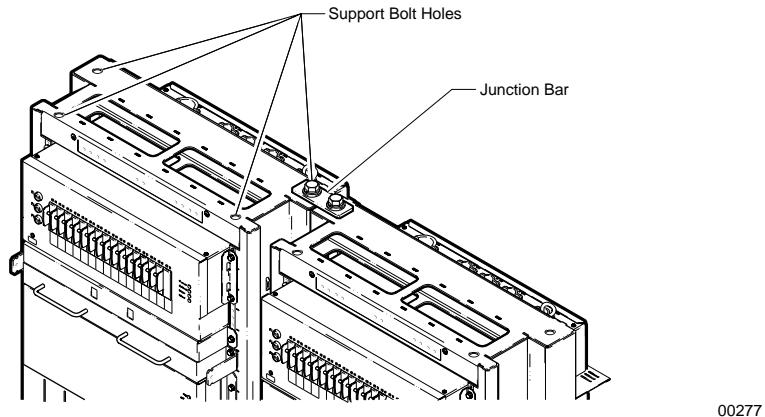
Junction Bar and Support Bolt Hole Locations
